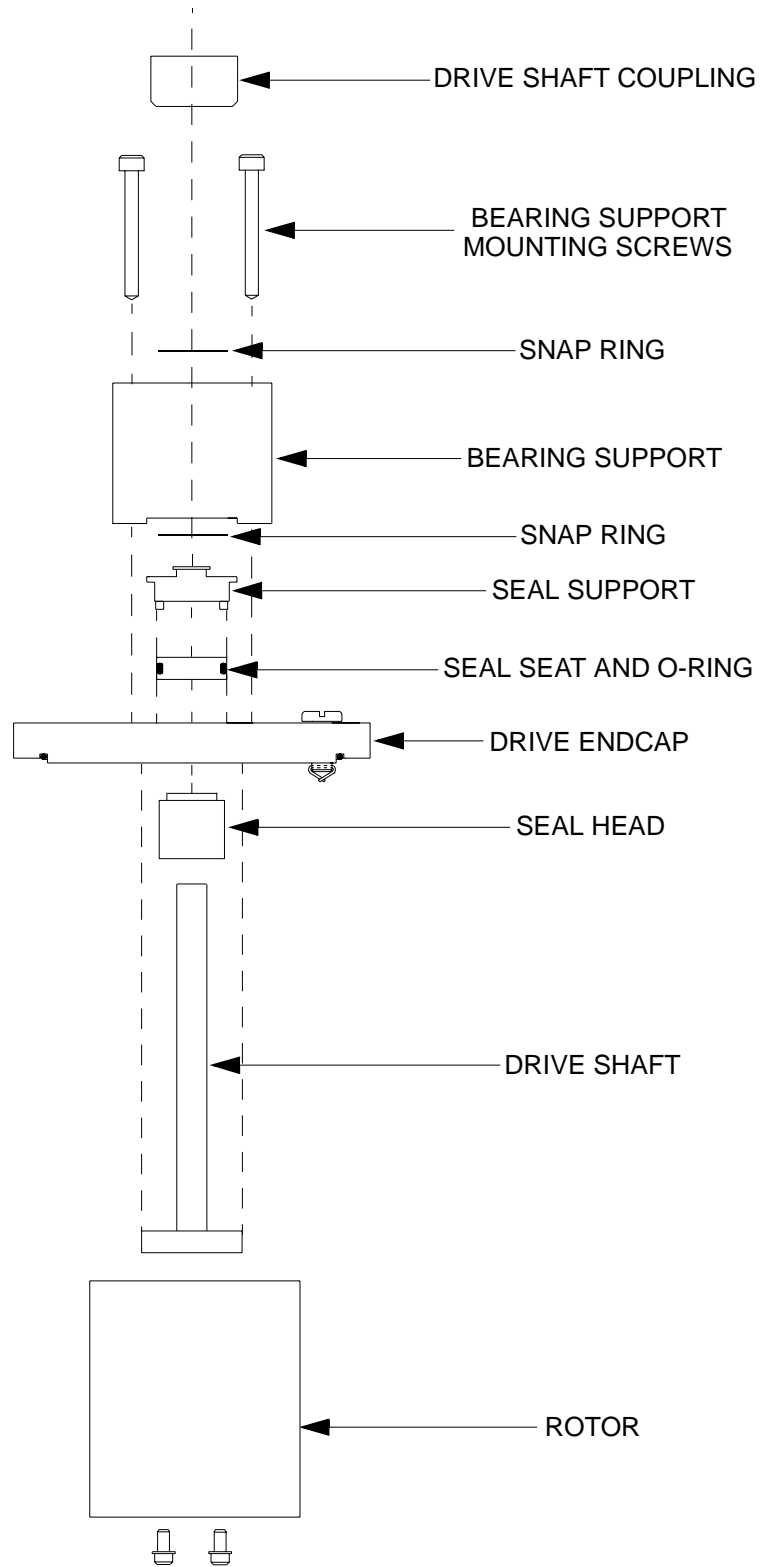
Drive Endcap Disassembly (with Single Mechanical Seal)
